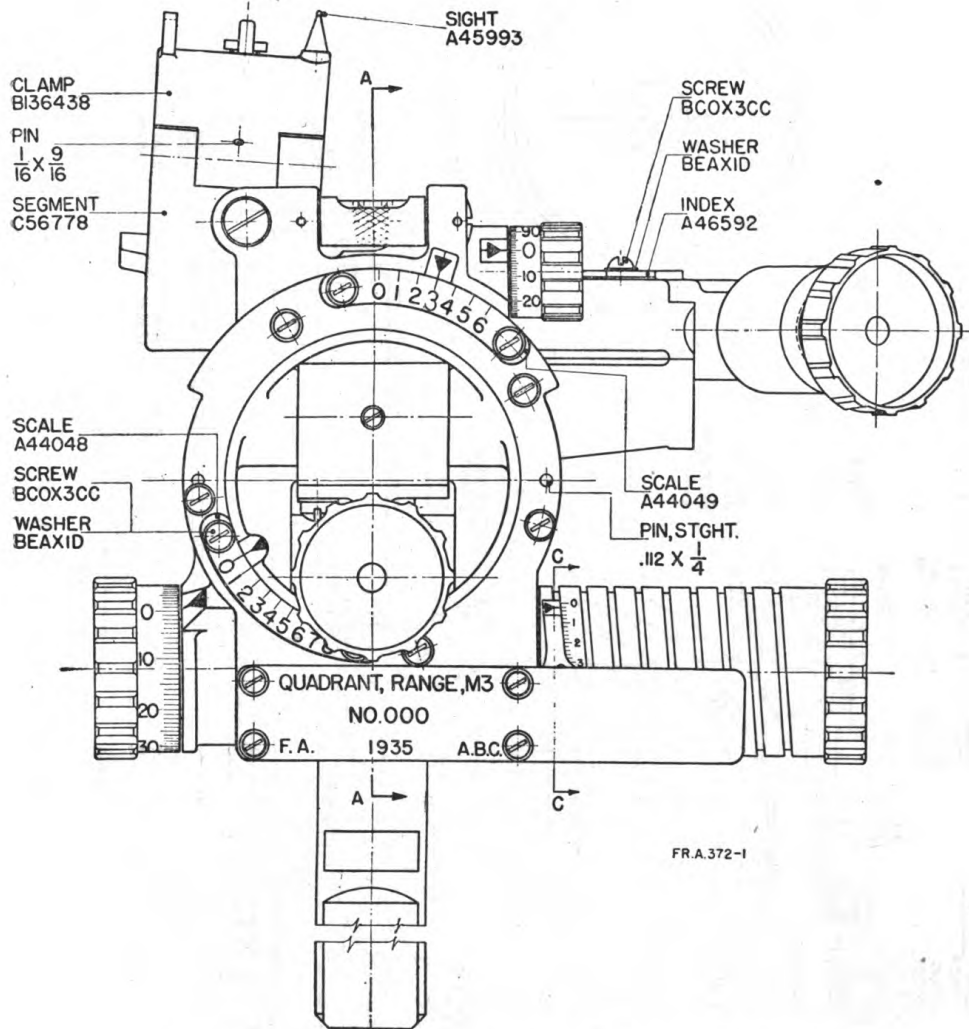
Range quadrant M3—assembled views—Continued.
